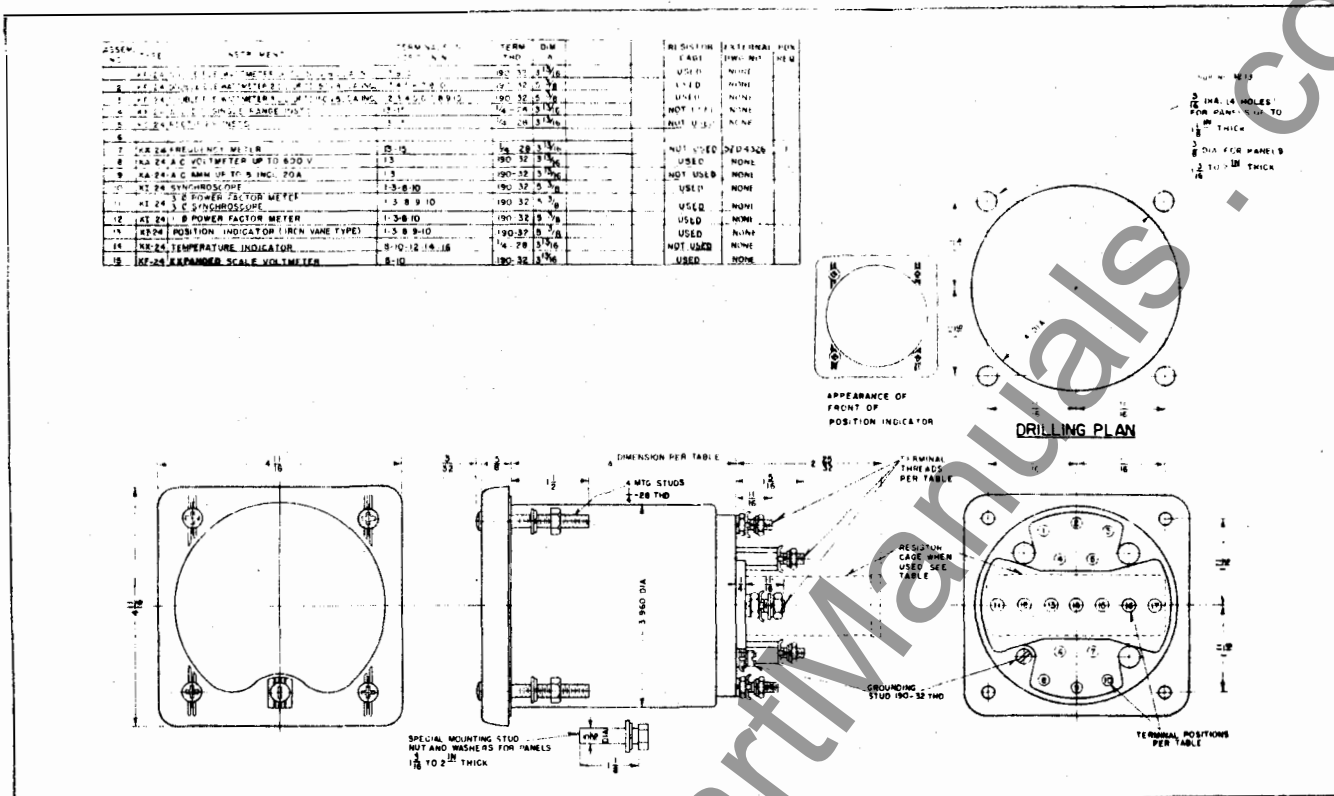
Outline Dimensions and Drilling Plan for Type K-24 Instruments.
